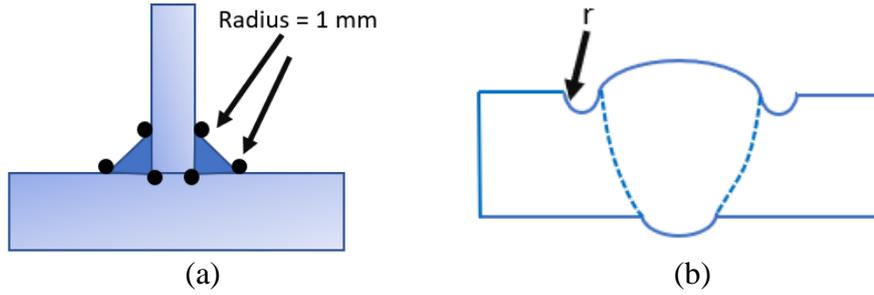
(a) Rounding of weld toe and root and (b) Rounding of a butt weld (Hobbacher, 2016).
